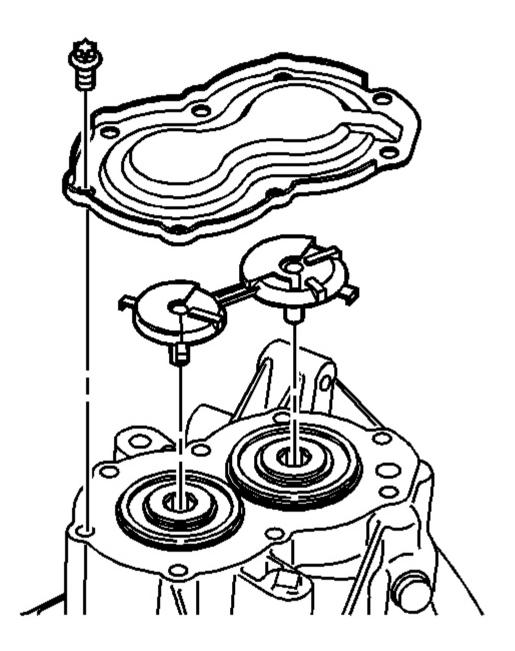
View Of Rear Cover Courtesy of GENERAL MOTORS CORP.
